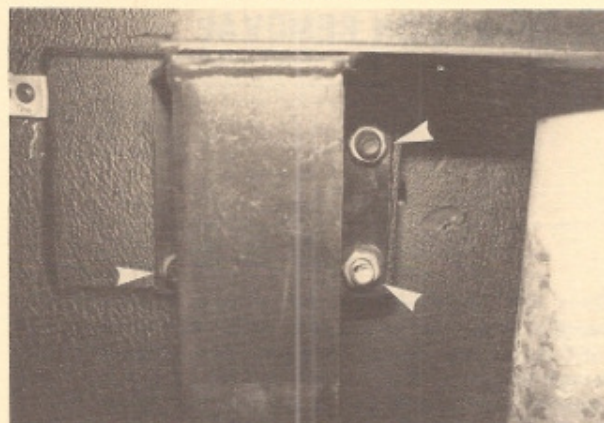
Auxiliary Equipment Removal: If there are any auxiliary items remaining, these should be removed prior to the placement of a 6000-lb. forklift at front of vehicle. Do not remove any frame bolts until the forklift is in position.
